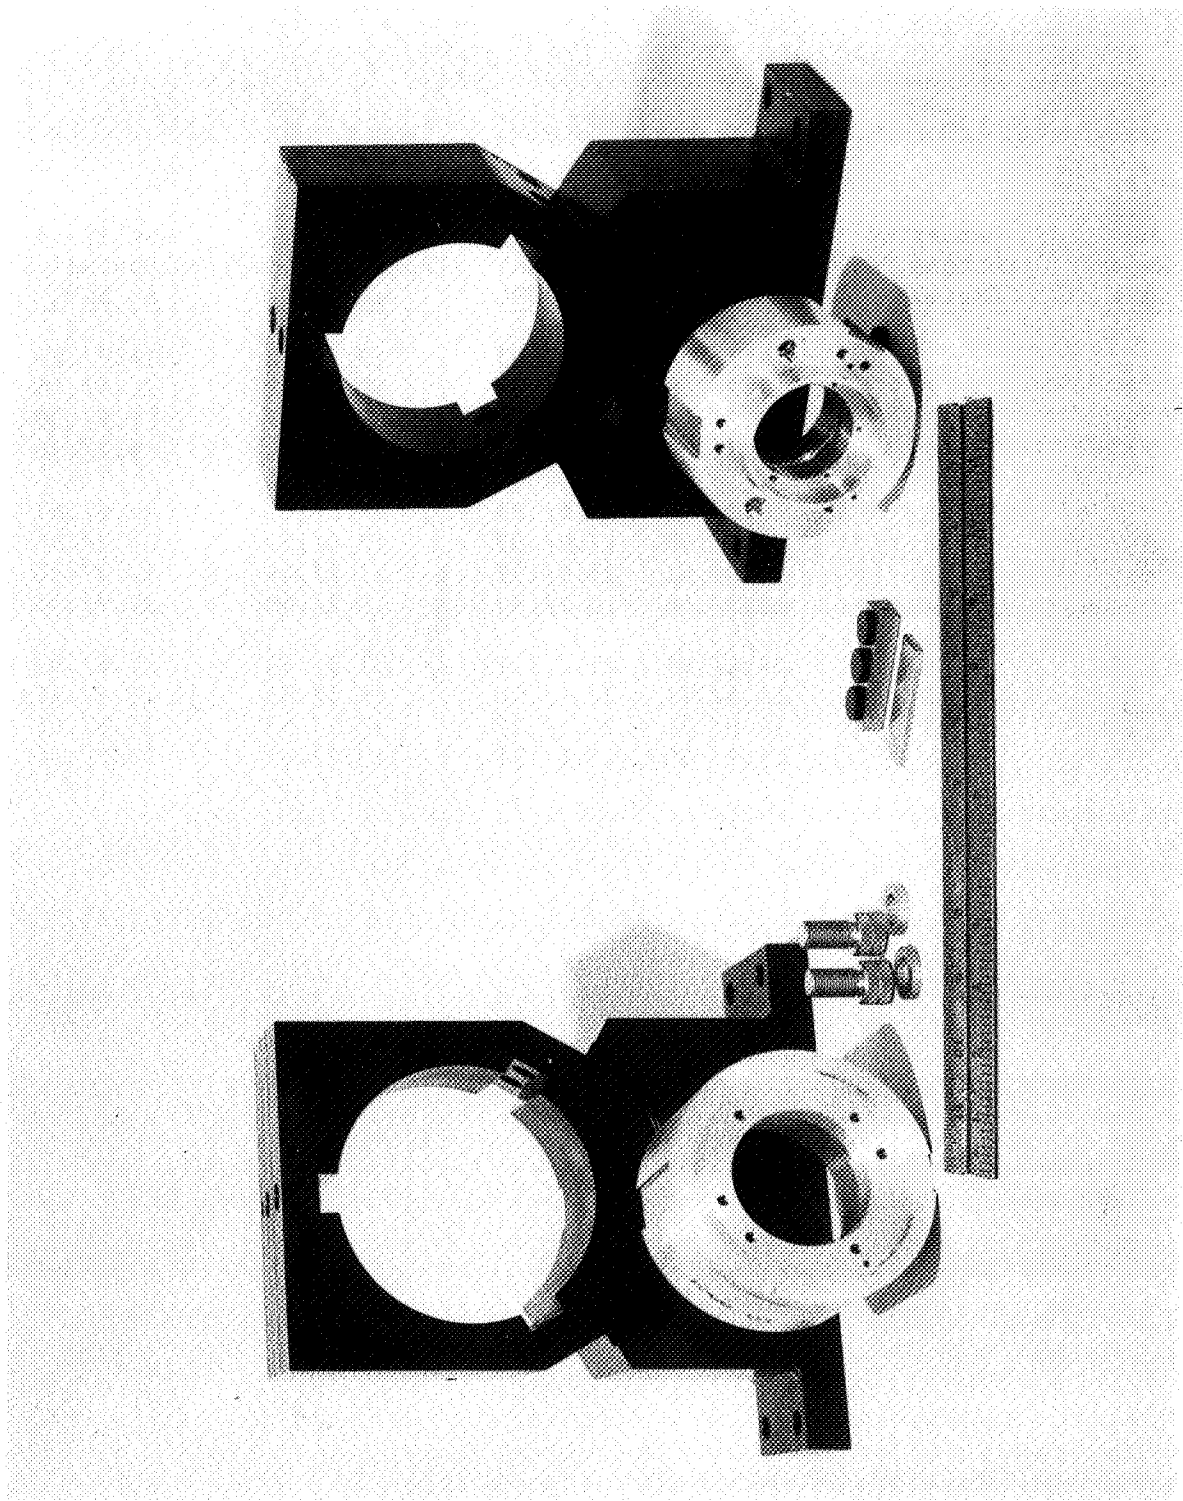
Elastomer Damper Rig, Pedestals, and Bearing Housings
